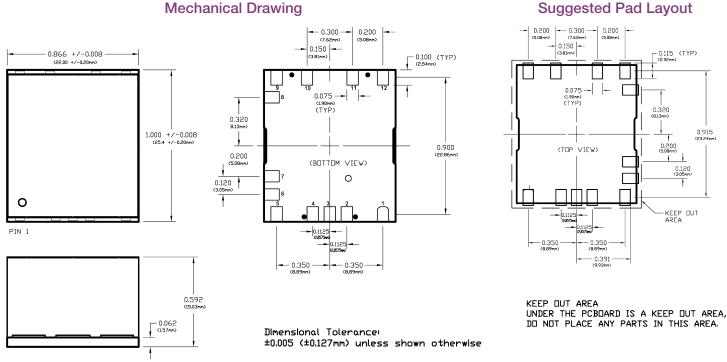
EH321-TFC-CC Mechanical Drawing and Suggested Pad Layout
